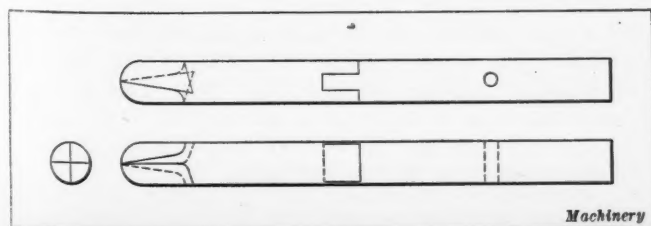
Cutter and Pin affording a Stop and Positive Drive
